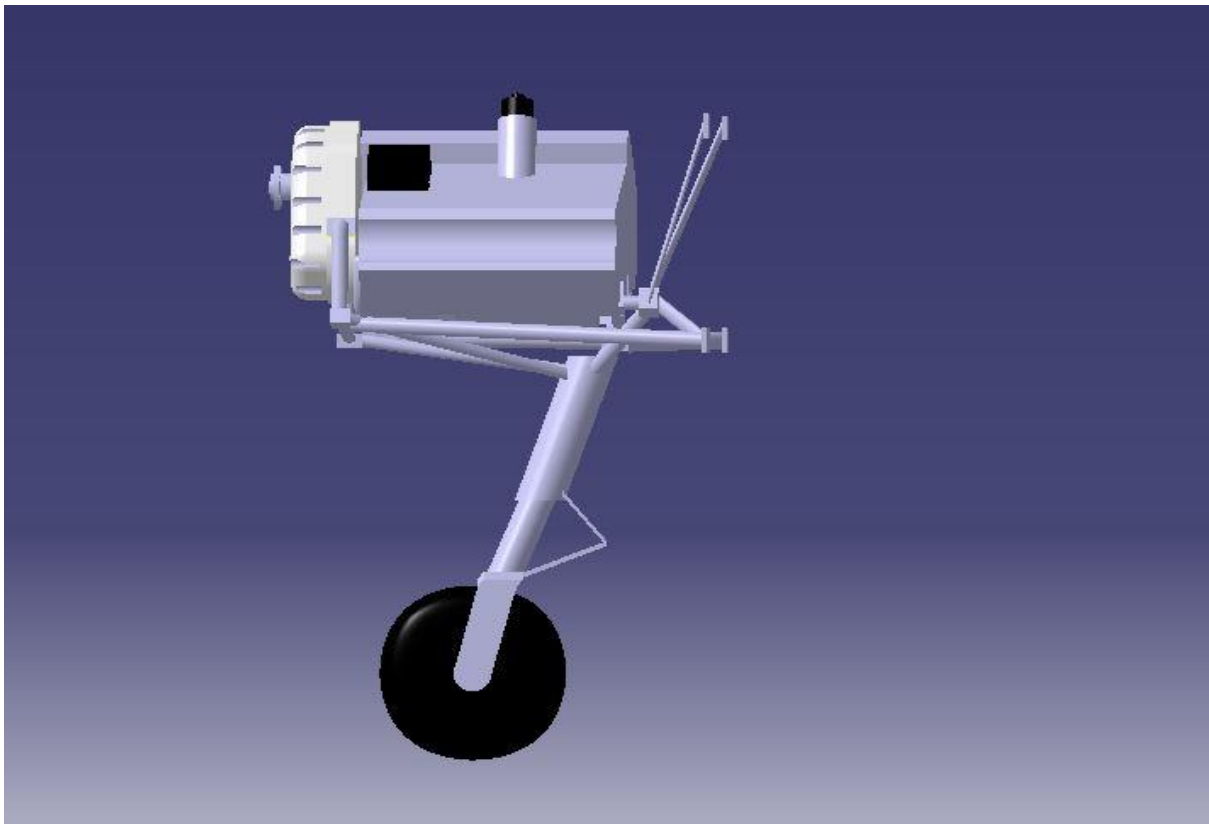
the engine AE300 assembled in the mount with nose landing gear
